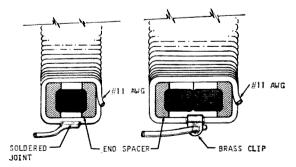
Details of alternate methods for making the tap connections to the toroidal tank coils. Care must be taken to prevent solder from bridging over to the core, thus promoting a flash-over. Excessive heat must be avoided when soldering near the end-spacers so as to prevent their being melted.
